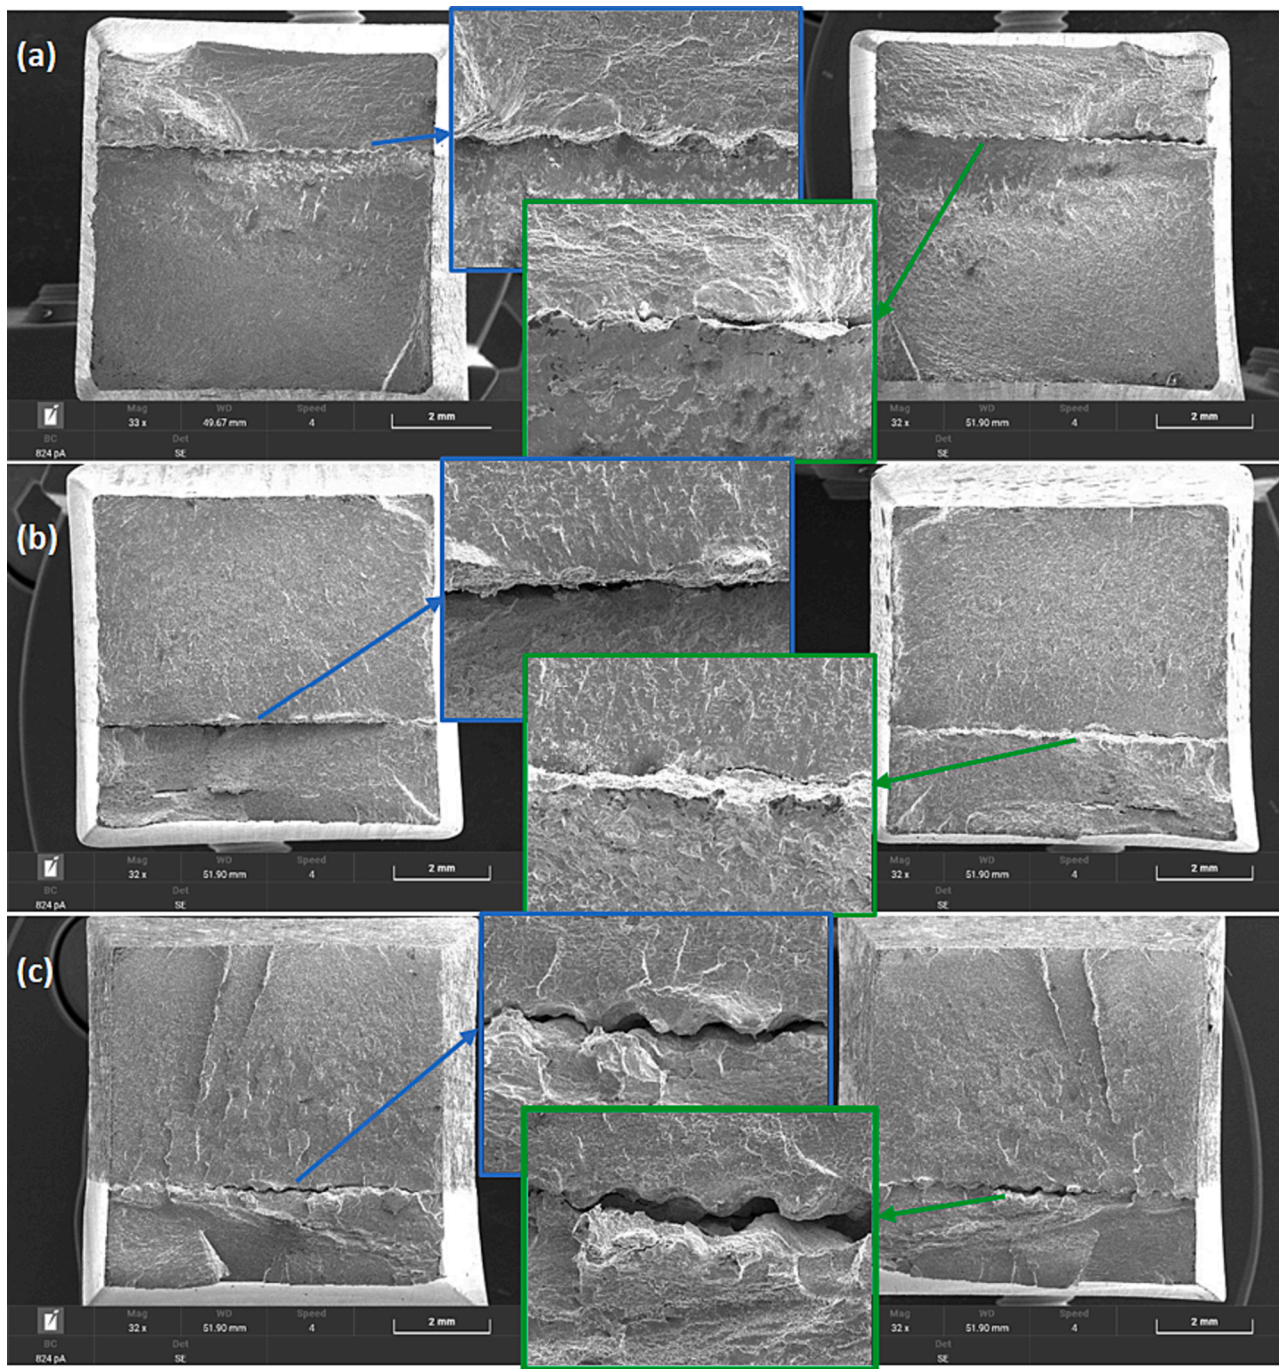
SEM fractography for the entire fracture surface (for both sides of the broken specimens): (a) specimen no. 1, (b) specimen no. 2 and (c), specimen no. 3.
